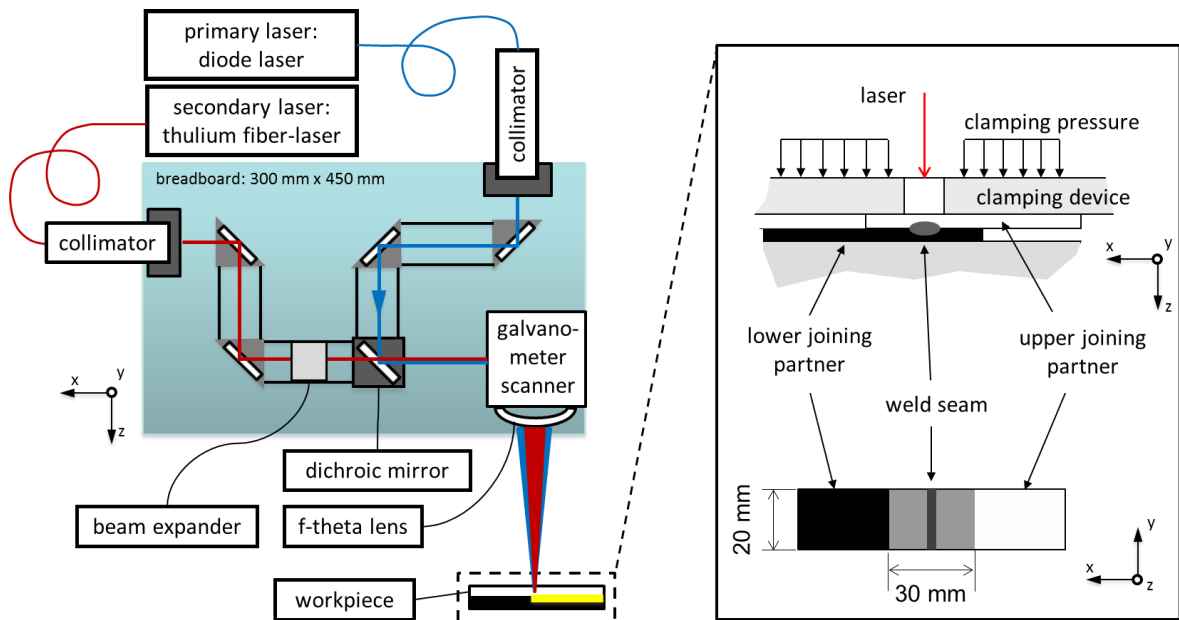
Experimental setup for laser transmission welding with a conventional diode laser as well as with a thulium fiber-laser (left), clamping technology and sample geometry (right)
